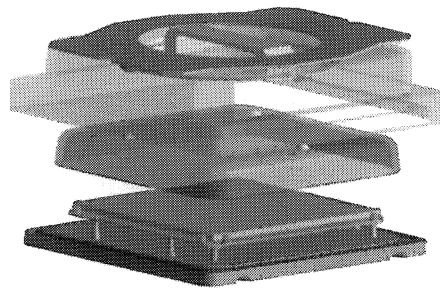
Exploded view of a proposed standard EUV reticle storage box.
